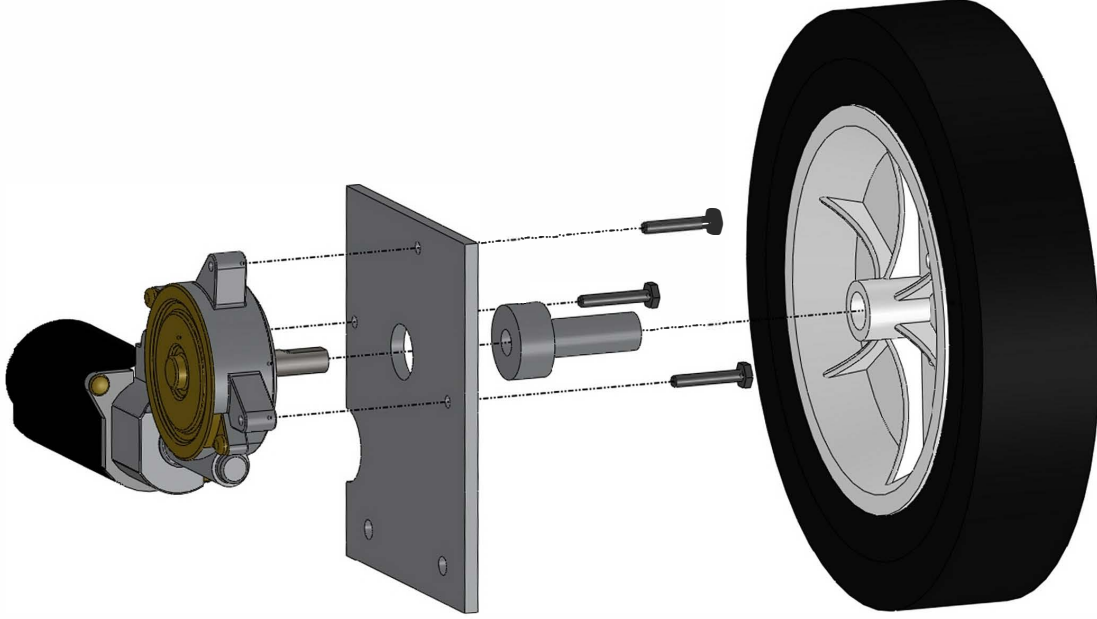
Exploded view of drive motor/hub/wheel assembly.
